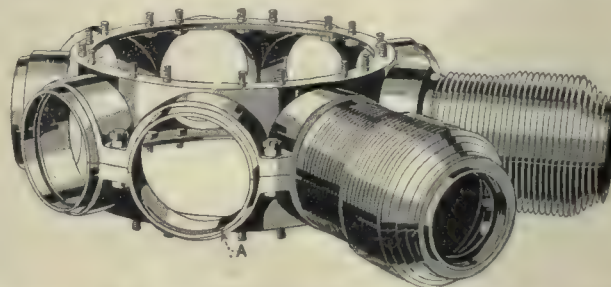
HOW THE CYLINDERS FIT THE CRANK CASE
